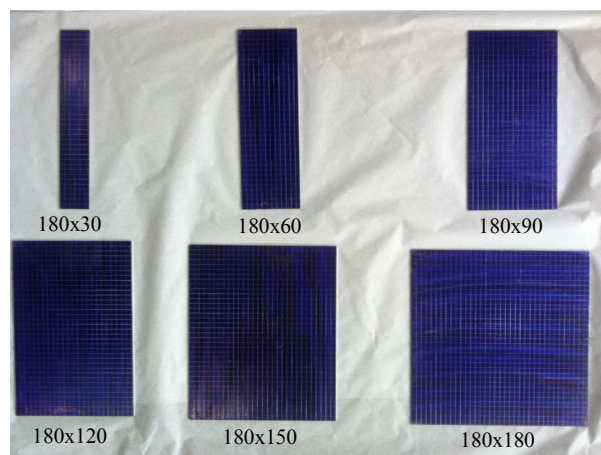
Samples to obtain the FLD, dimensions in millimeters.
